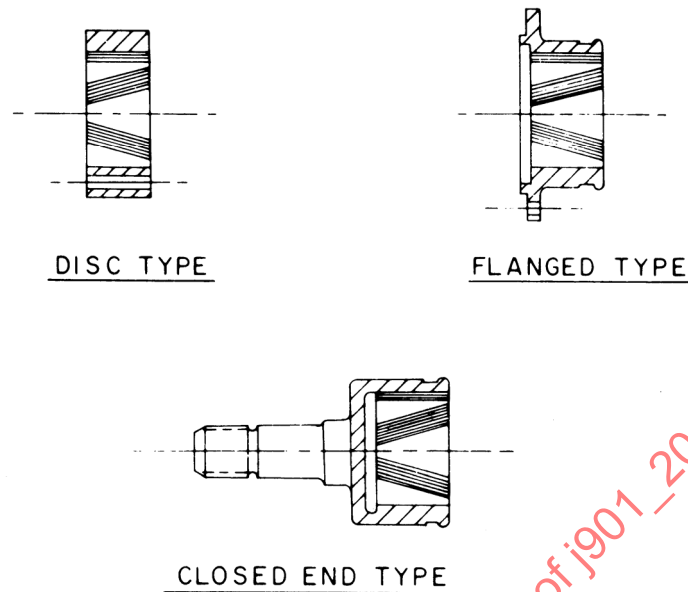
TYPICAL CROSS GROOVE JOINT OUTER FACE CONSTRUCTIONS
